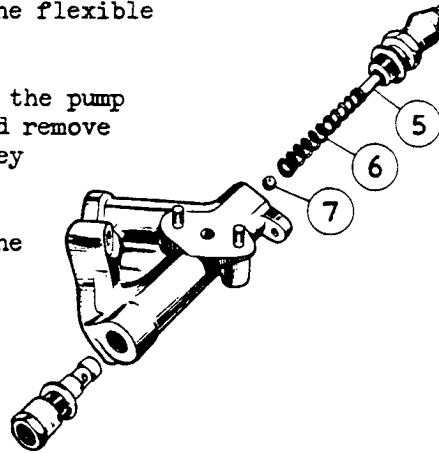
THE PUMP AND VALVE ASSEMBLY.
